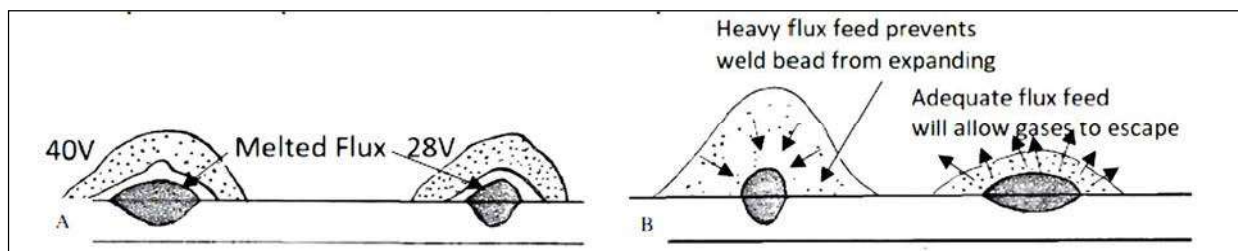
(A) Impact of arc voltage on bead/slag shape and flux consumption. High voltage melts more flux. (B) impact of flux feed on weld bead and gas discharge.
